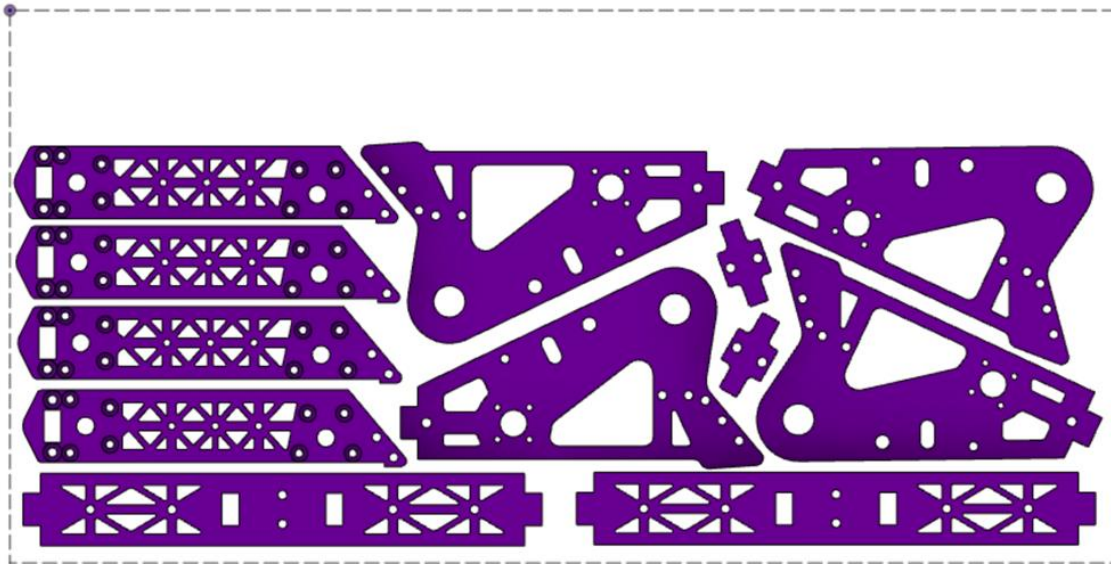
12" x 24" Aluminum Frame Layout for Laser Cutter
